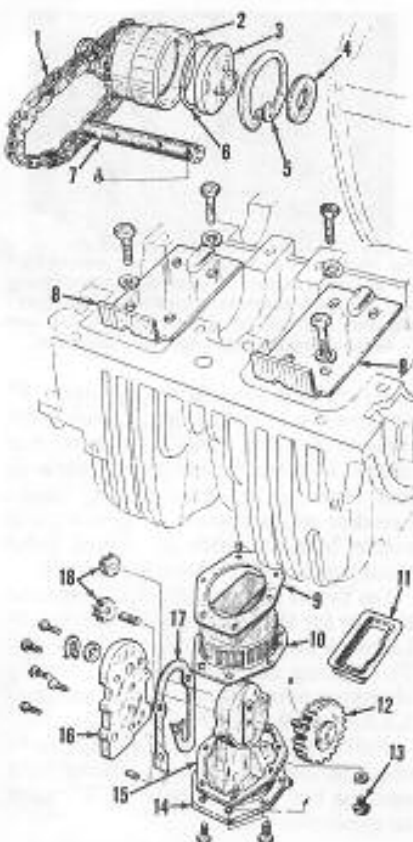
Exploded view of oil pump and centrifugal oil filter unit.
